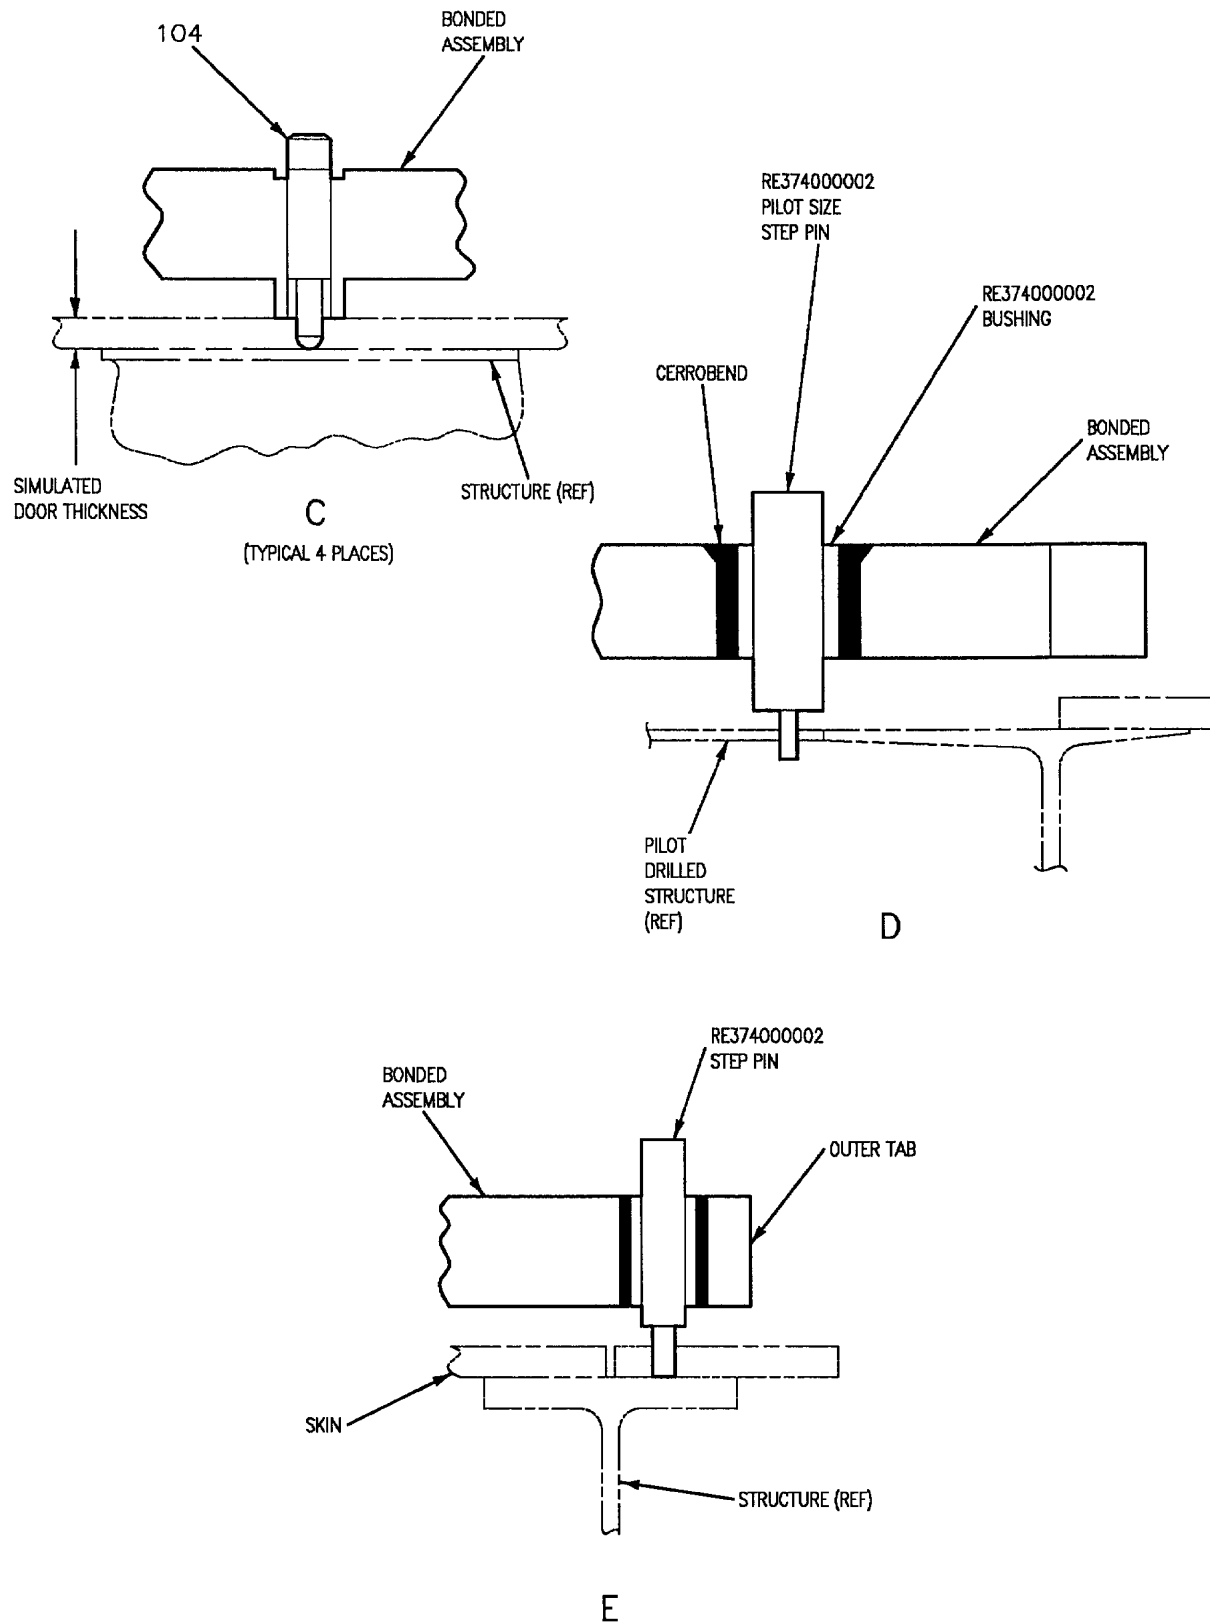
Installation of Plate Set for Drilling 74A150824 Skin and Substructure (Sheet 3)
